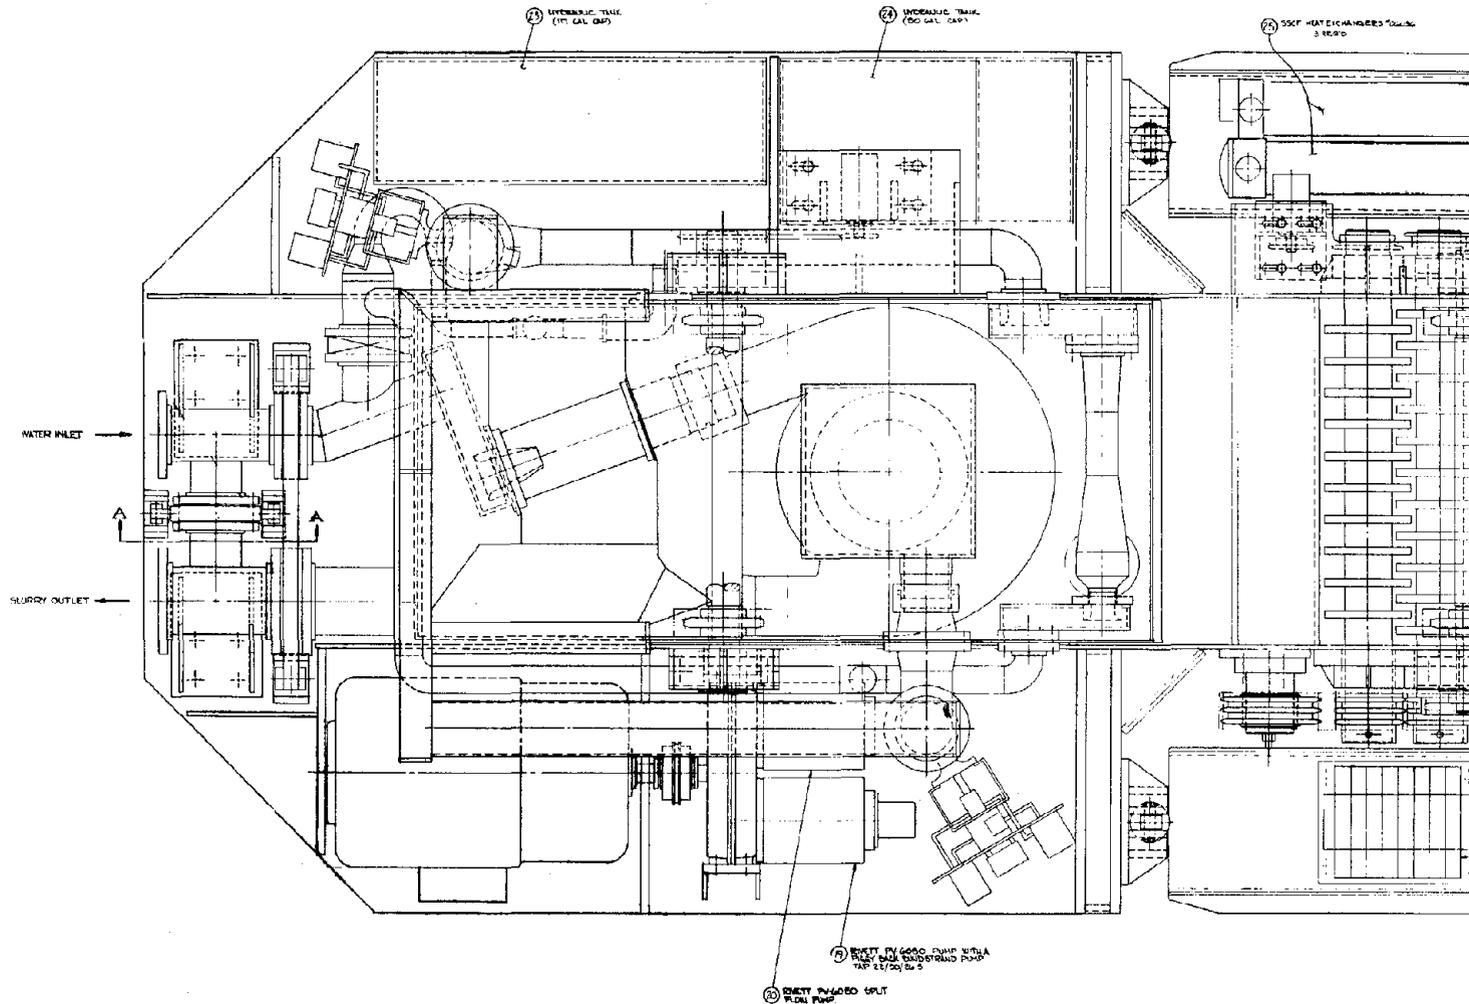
Ingersoll-Rand/S&S Jet Pump Injector Vehicle, Rear Top View
